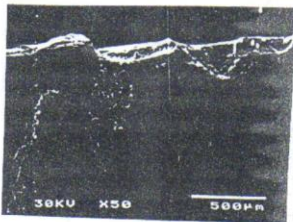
c. Tool nose wear for machining the composite specimen at a cutting speed of 183 m/min, feed of 0.2 mm/rev and depth of cut 0.25 mm using a carbide ceramic tool.
